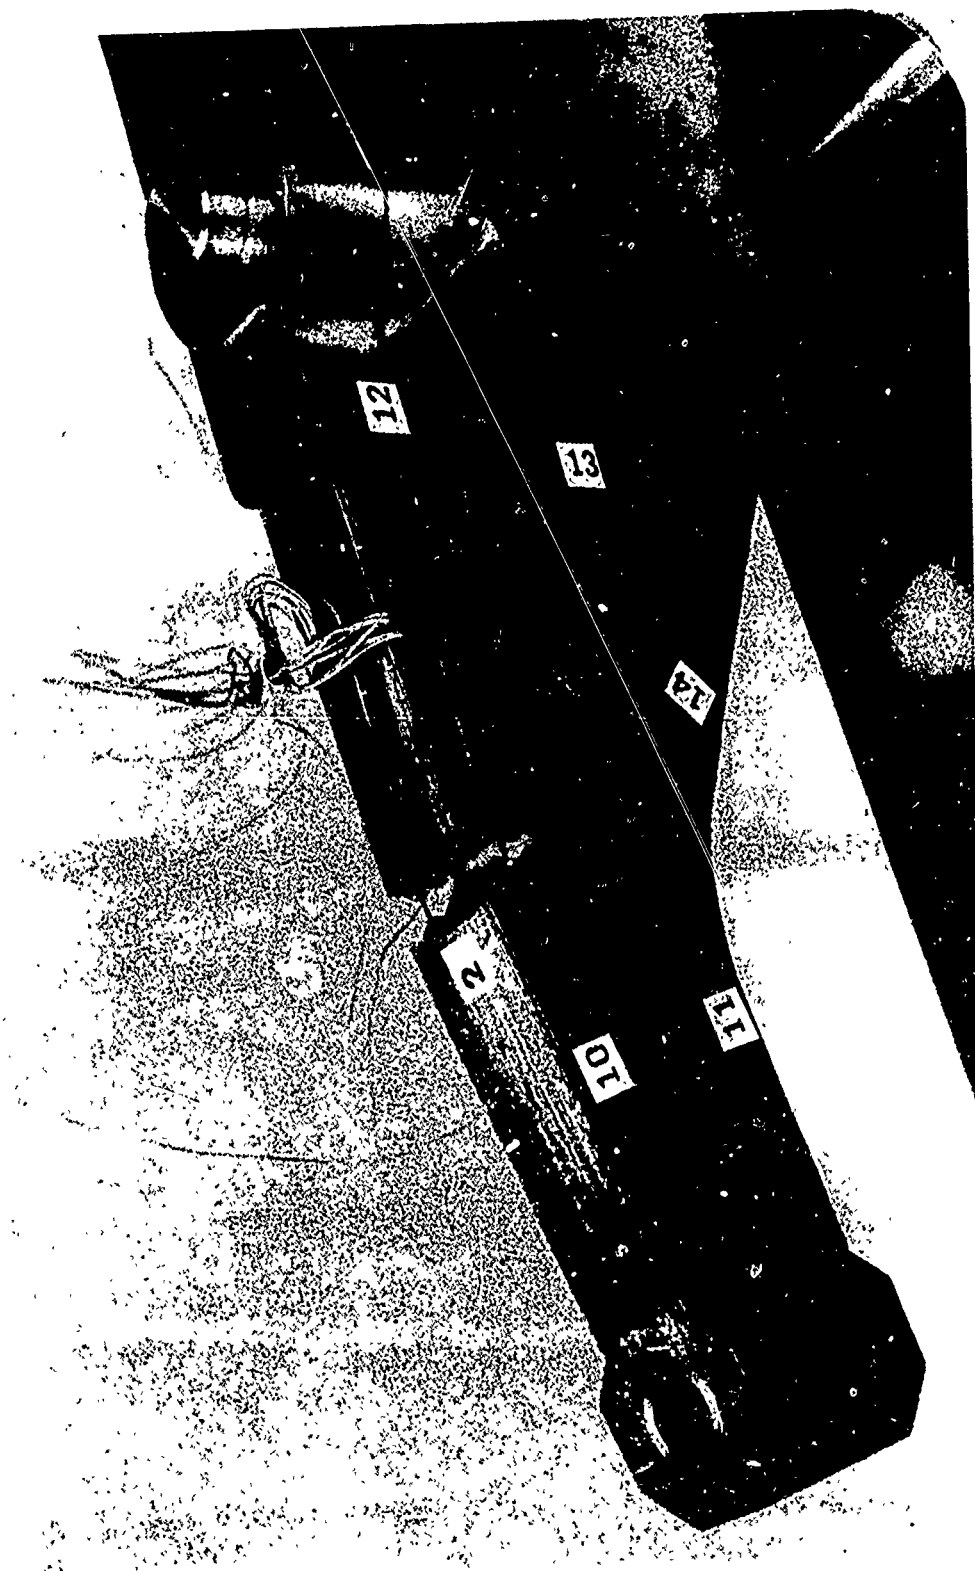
BOR-SIC-Aluminum Torque Arm Specimen
